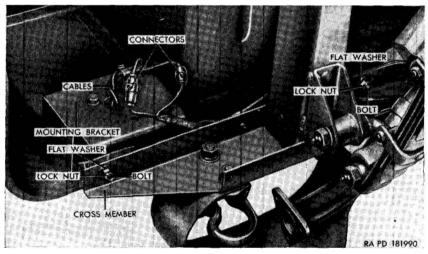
(Added) Body hold-down bolts rear cross member and blackout tail and stoplight cables M170.
